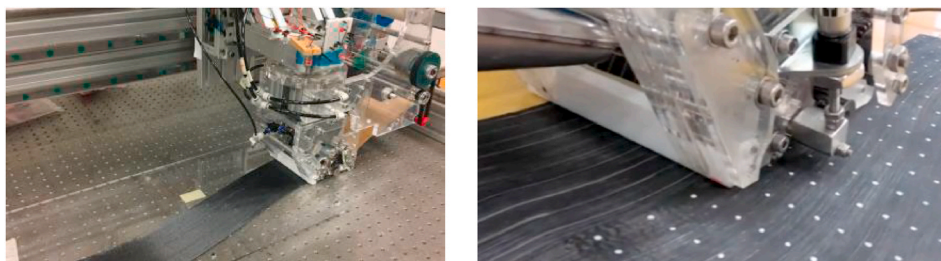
Overview of CTS machine (left) and wide tape CTS machine steering a 100 mm wide unidirectional prepreg tape (right).
